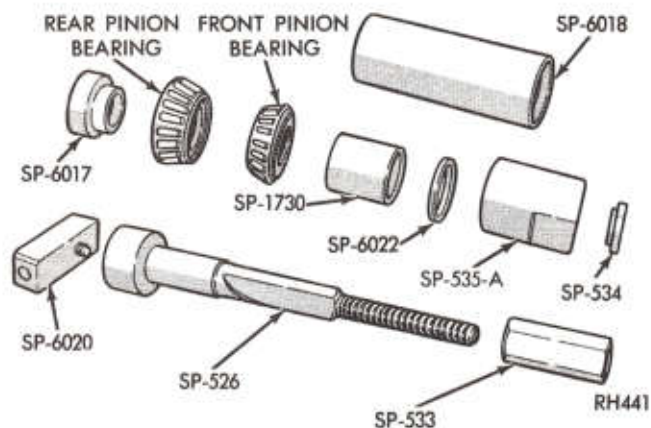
9-1/4 Inch Rear Axle Pinion Setting Gauge Tool
